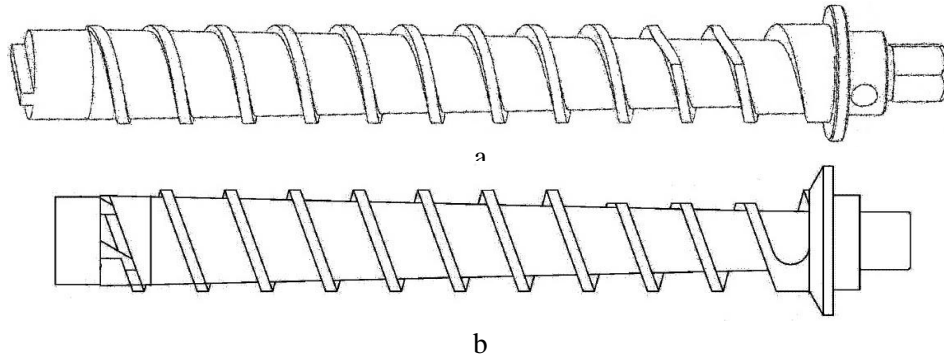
An improved ridge of the screw cutting of the screw feed section: a – Patent No. CN204488078U; b – Patent No. CN203739263U
